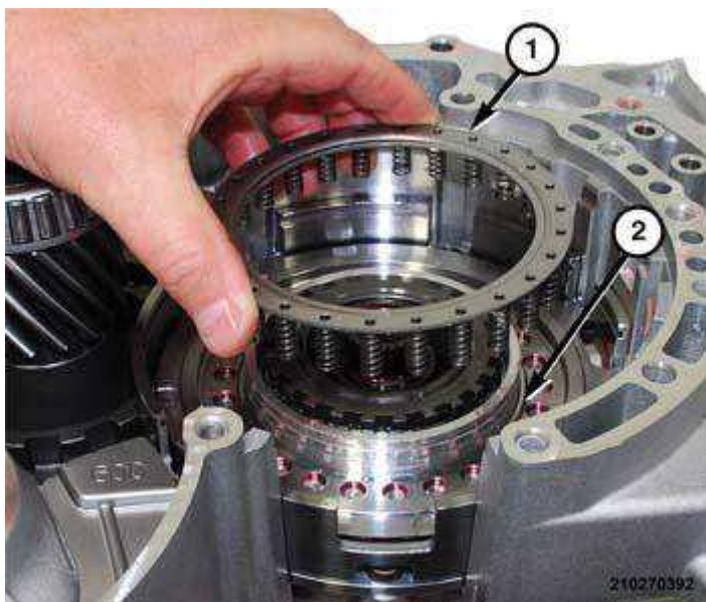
Underdrive Spring Retainer & Underdrive Brake Piston
